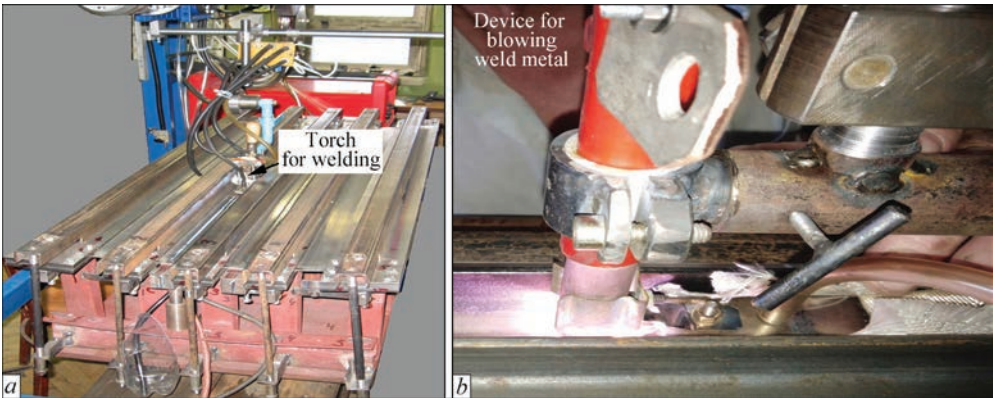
Appearance of the complex for TIG welding of MM: *a* — bench for assembly and welding of specimens; *b* — TIG process using blowing of the outer surface of the cooling weld metal (for TA2 alloy)
